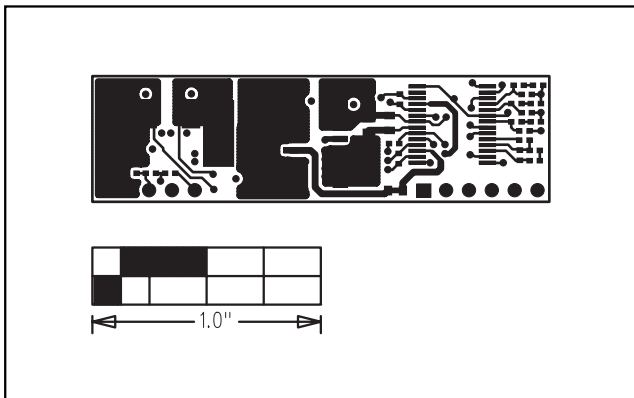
MAX5065 EV Kit PC Board Layout—Bottom Layer
